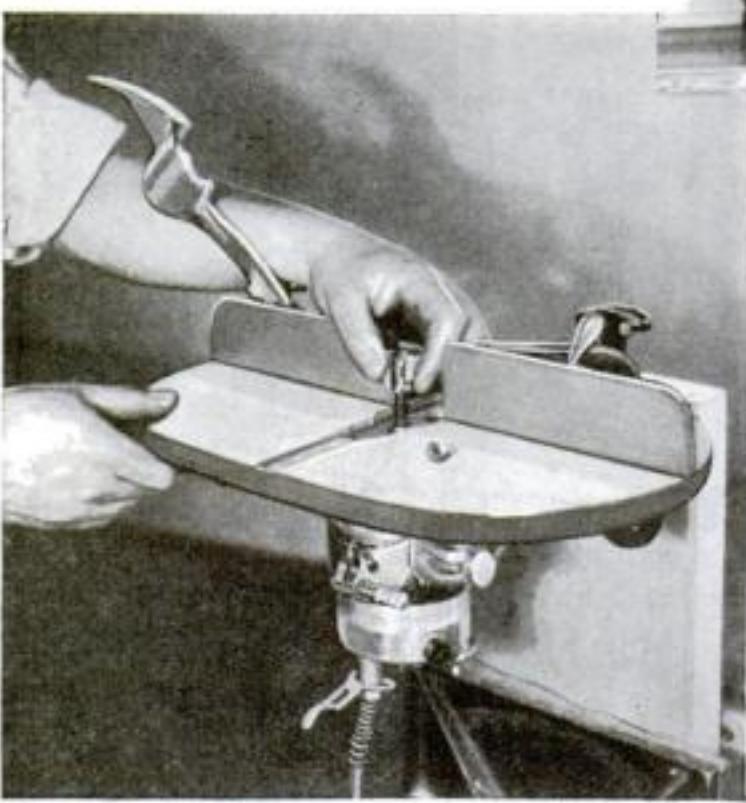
Putting the cutter head on a small portable table shaper. Note the metal cutter guard swung up out of the way. The shaper is mounted on a board which is held in a vise.
